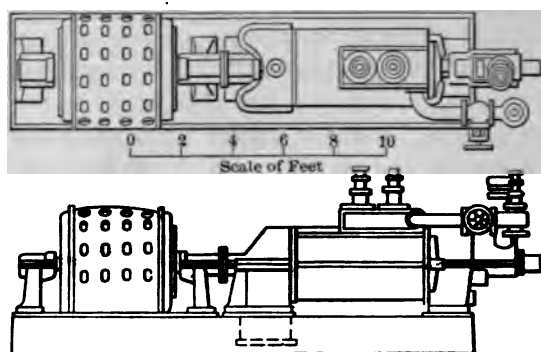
Plan and Elevation of 500 Kw. Westinghouse Turbine.
